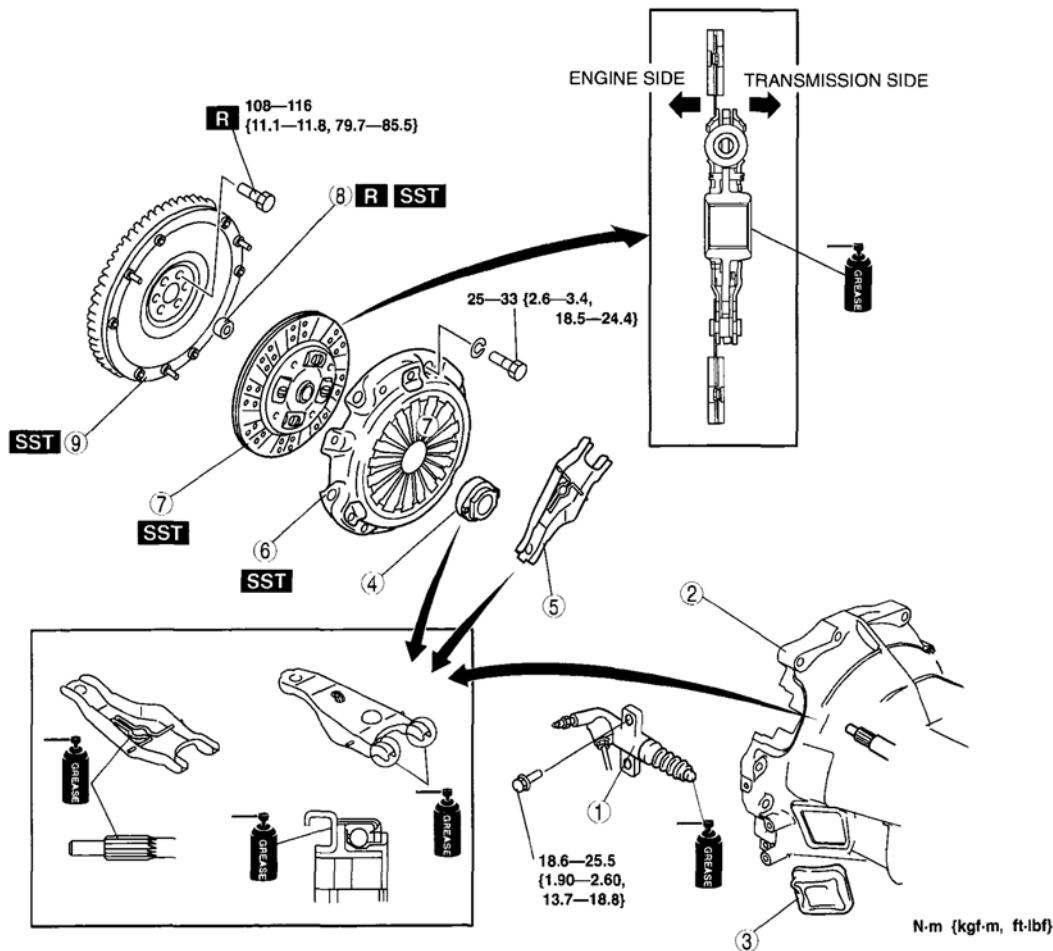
Exploded View Of Clutch Release Cylinder Components (With Torque Specifications)
